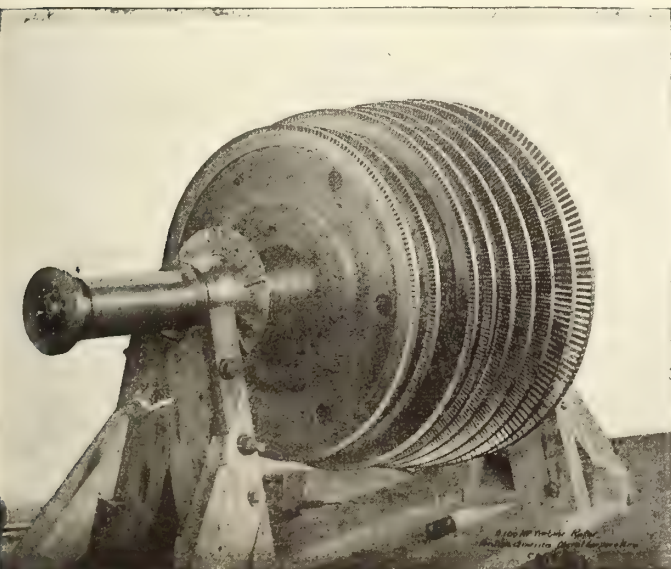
Rotor of 2,100 h.p. Condensing Steam Turbine.
